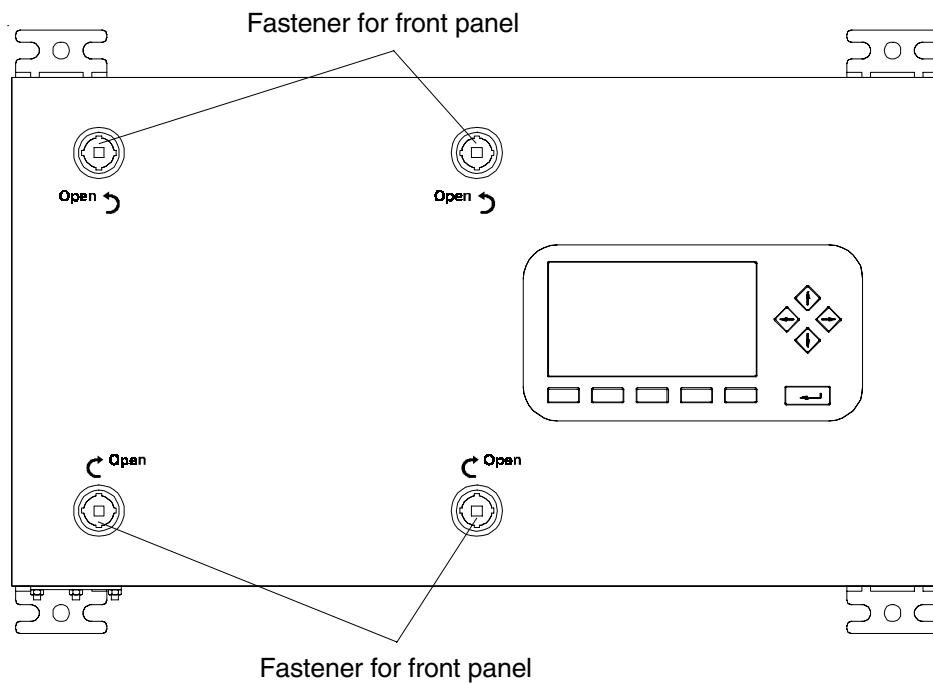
MLT 2 (Field housing) (fastener for front panel)
